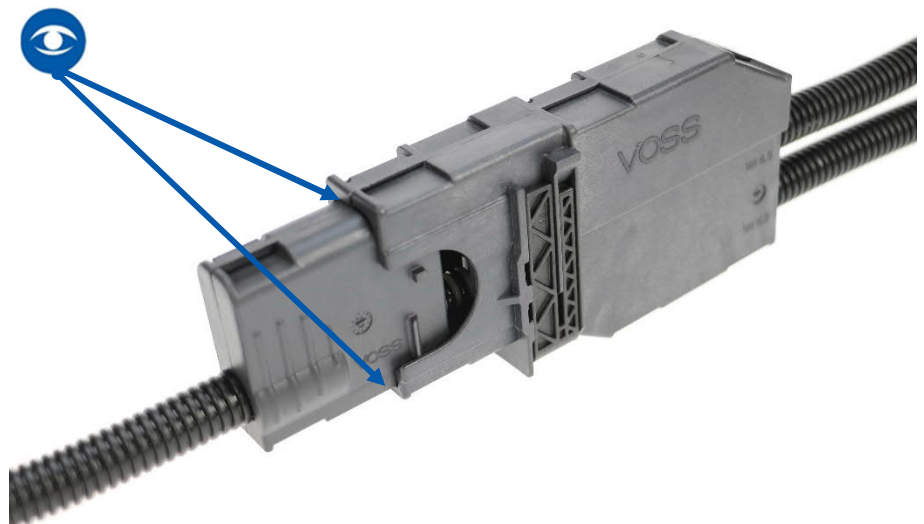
Poka Yoke design of manifold 301 ^{EFSM}
